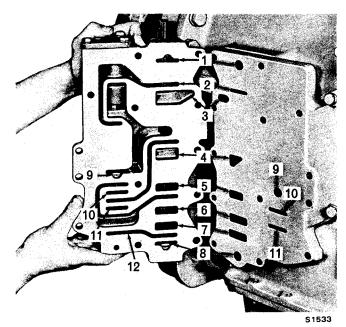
Lockup valve assembly and mounting pad—oil passages
